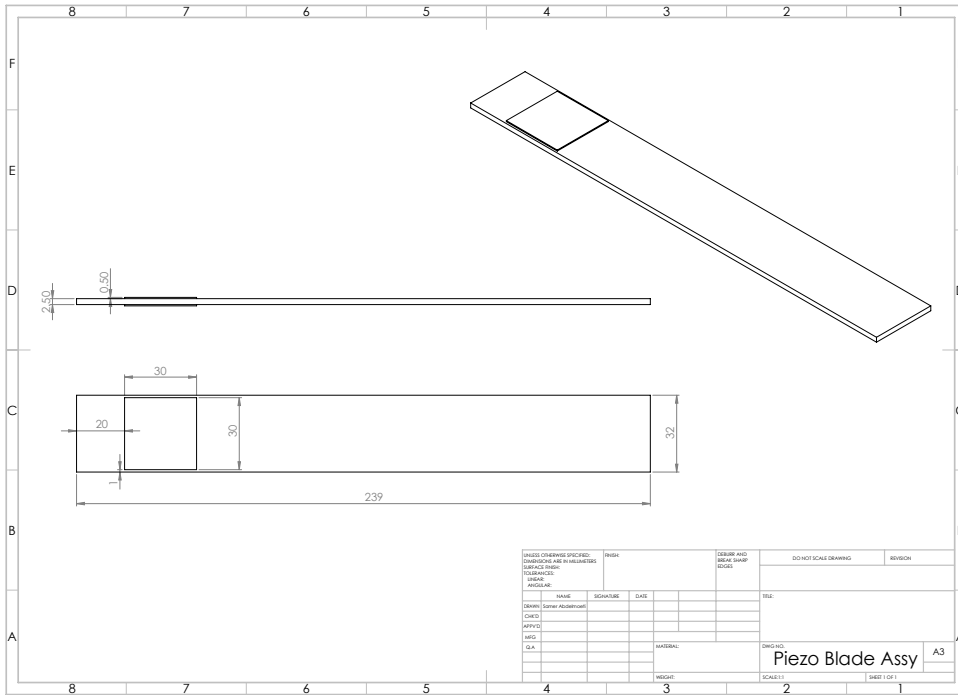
Piezo embedded into stainless steel blade on both sides.
